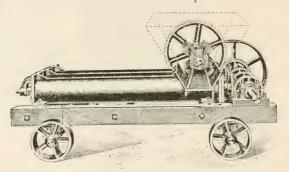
Heinen's triple-spiral pulp peat machine, with preliminary tearer and mixer.
